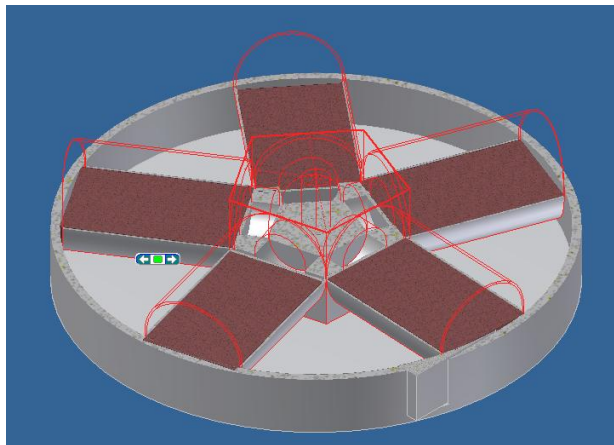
Fillings Dispenser Unit (Cross-sectioned)
